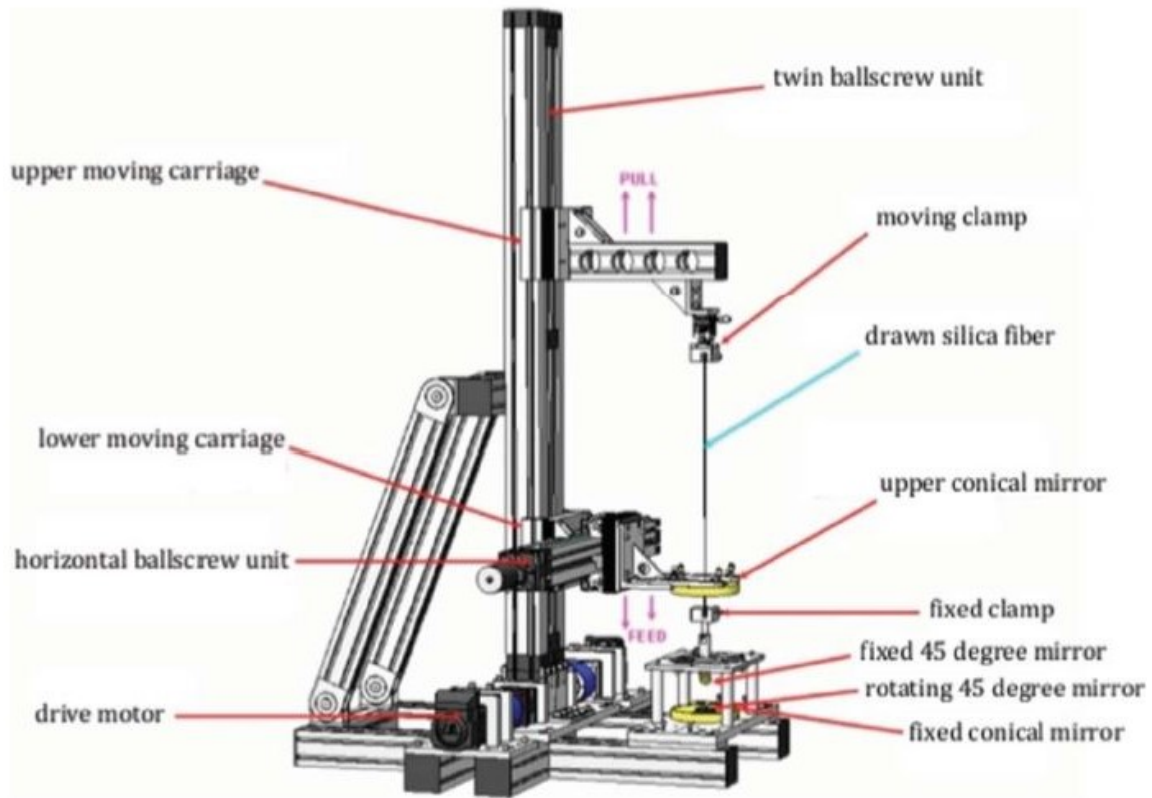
CAD Drawing of the aLIGO pulling machine with all major components labeled [4, 12].
